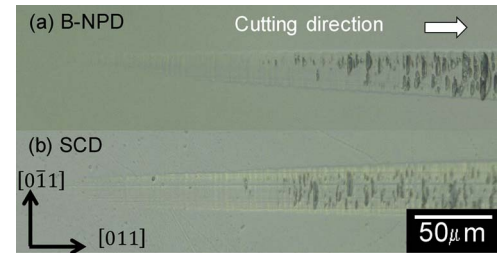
Surface morphologies of the plunge-cuts of CaF_2 machined by (a) B-NPD tool and (b) SCD tool.
